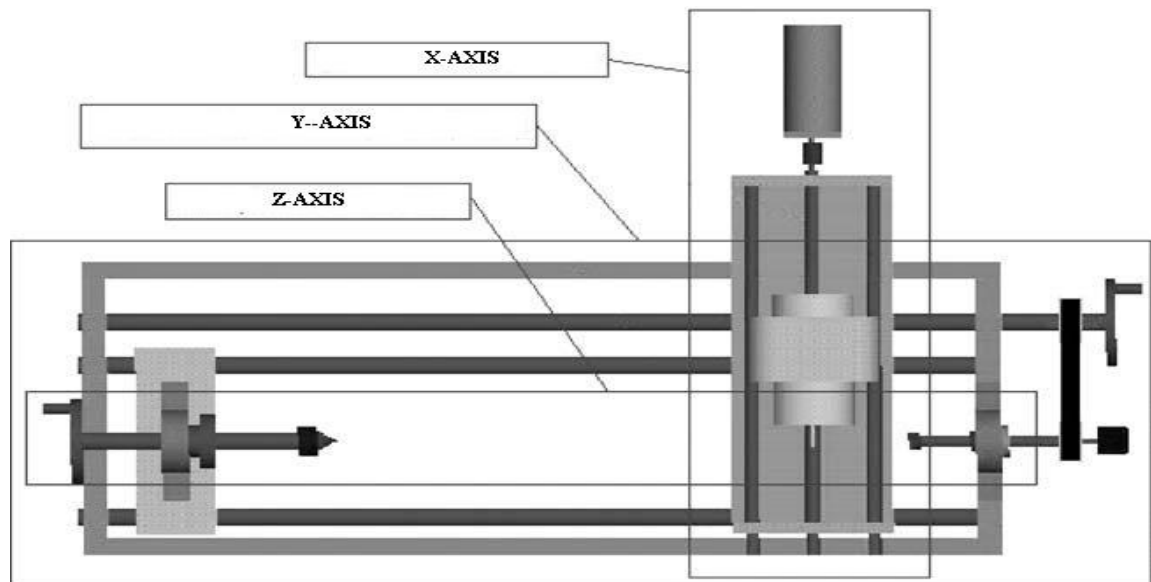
CAD drawing of the single controlled axis lathe mill (SCALM) with axes highlighted
